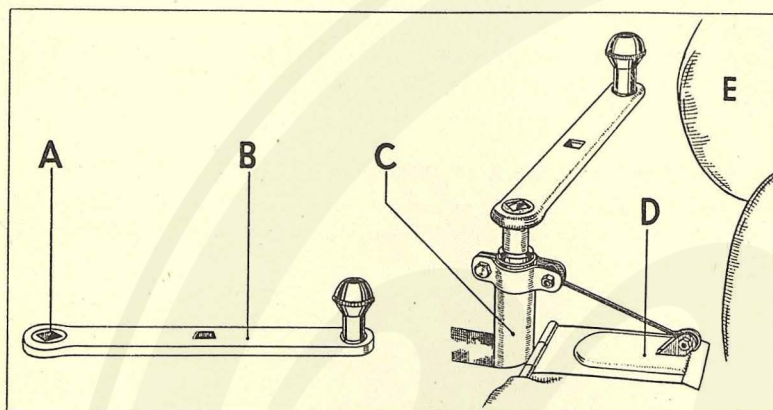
Jacking system. A, ratchet; B, jack handle; C, jack; D, trap door; E, driver's seat.
